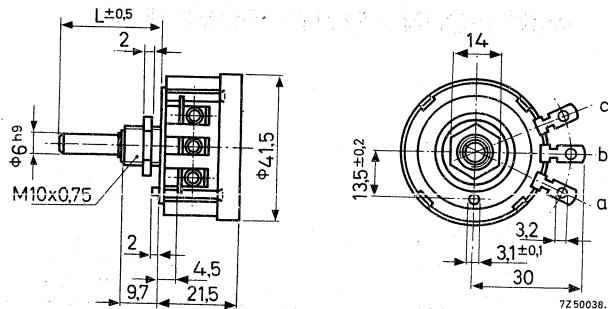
Potentiometer with plain spindle. The spindle length L is 20, 25, 30, 35 or 80 mm.
